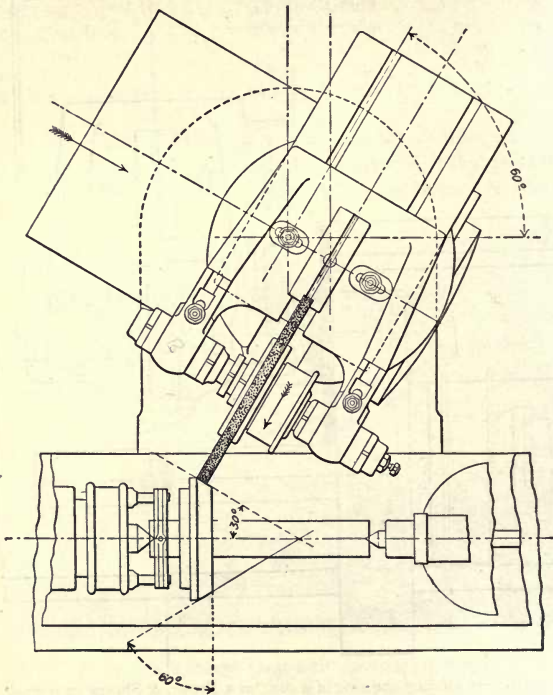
Grinding an abrupt taper on a Brown & Sharpe universal grinding machine.
